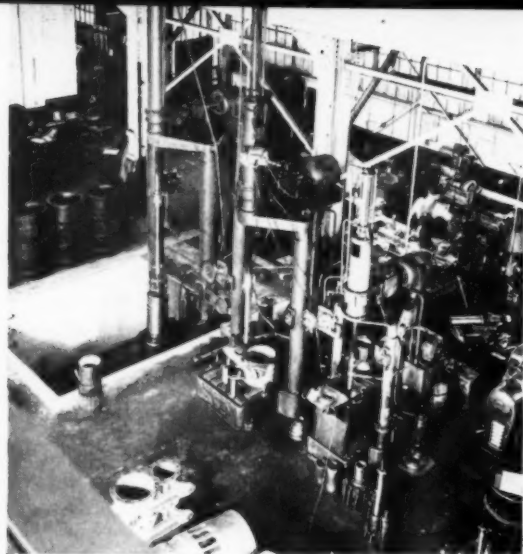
A battery of honing machines at the Van der Horst Corp. Products being finished include diesel liners, a cylinder from a cross compound air compressor. Cylinders of other sizes and types are on the floor. All of them were finished on these machines.
